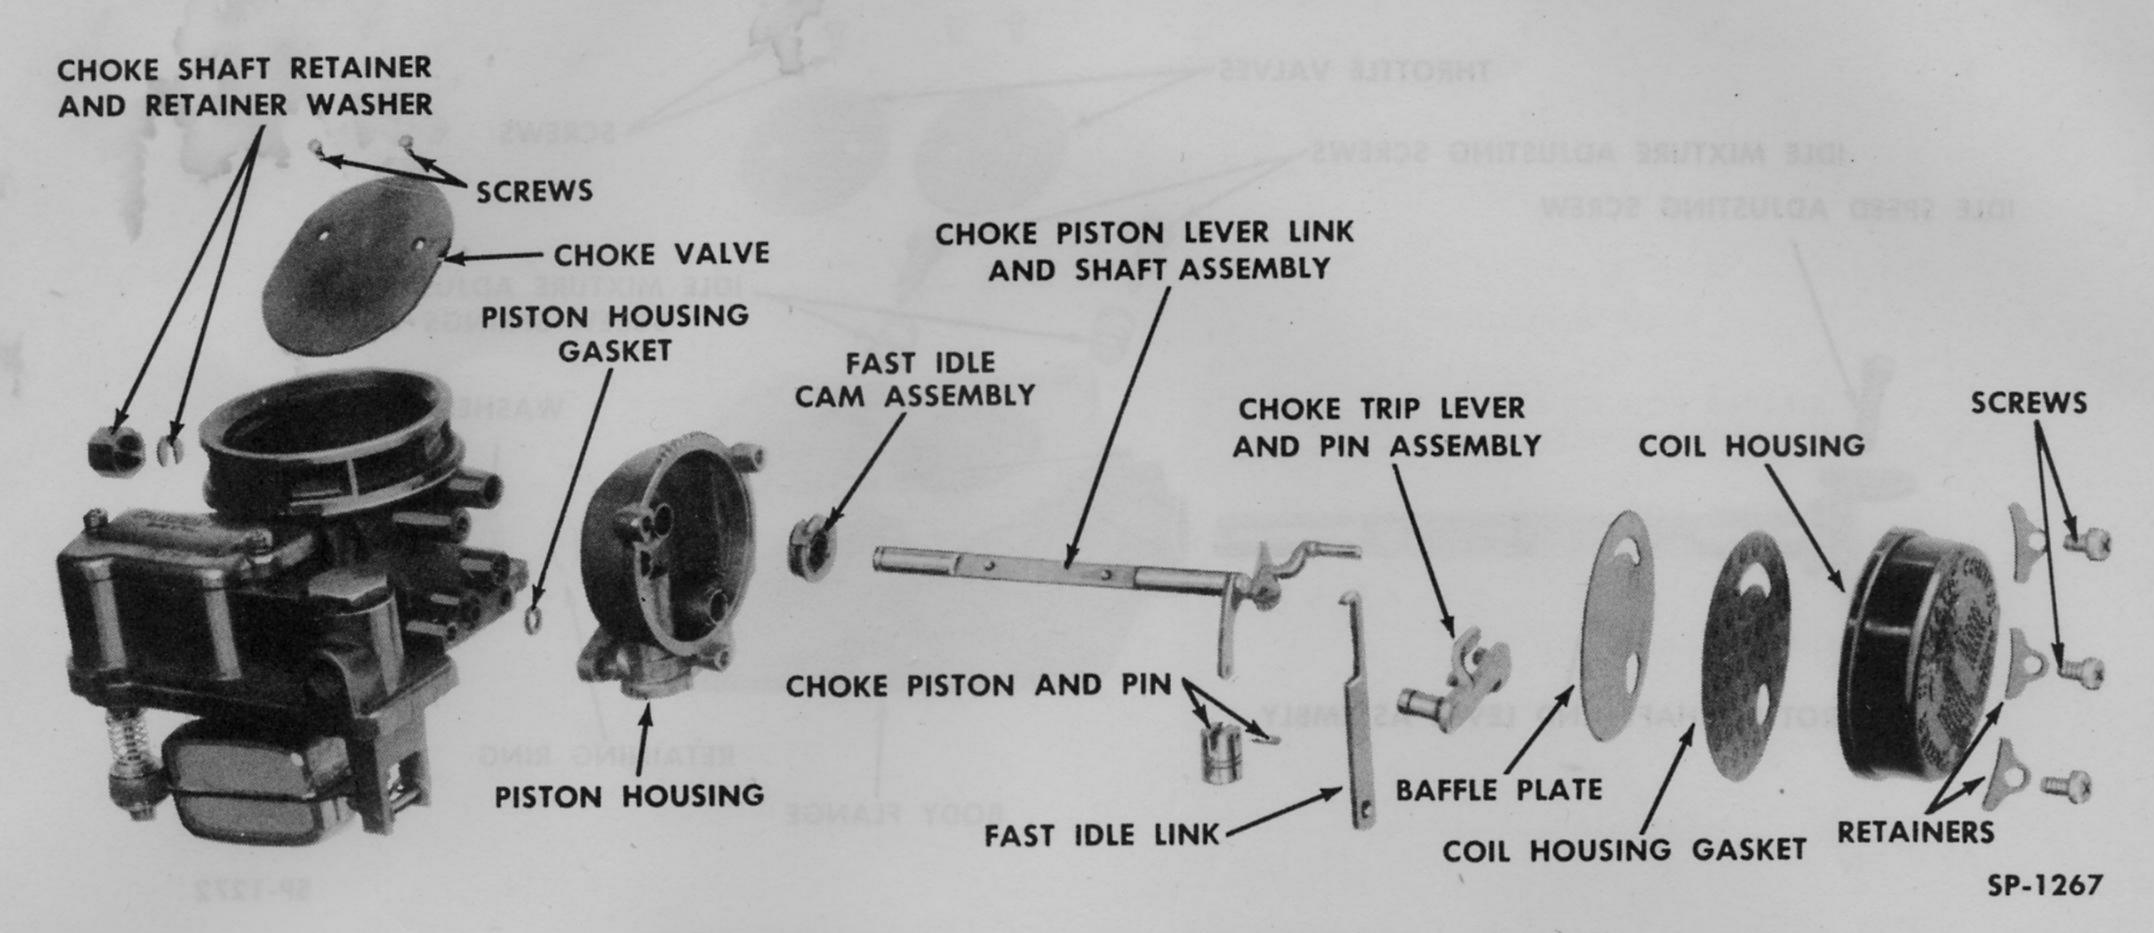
Choke Assembly—Exploded View (WGD-7815 and 8135)
